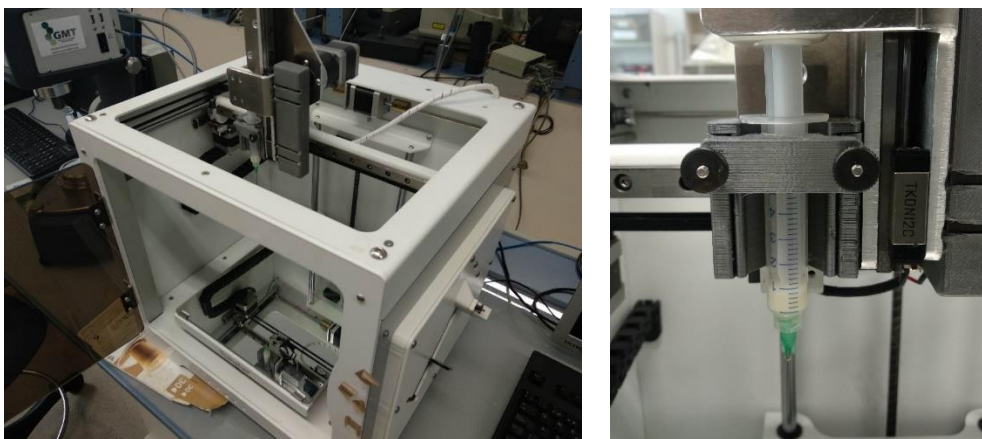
General overview of the DIW 3D-printing equipment (left), modified head of the printer for DIW 3D-printing (right)
